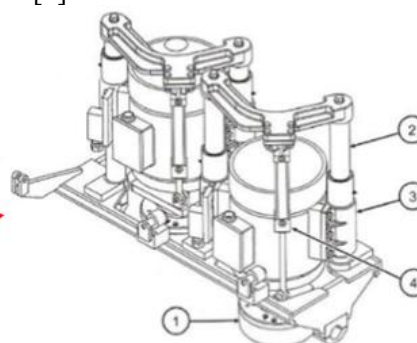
GMC-96B Grinding Vehicle: (1) Grinding Wheel; (2) Guide Column; (3) Guide Tube; (4) Servo Cylinder
